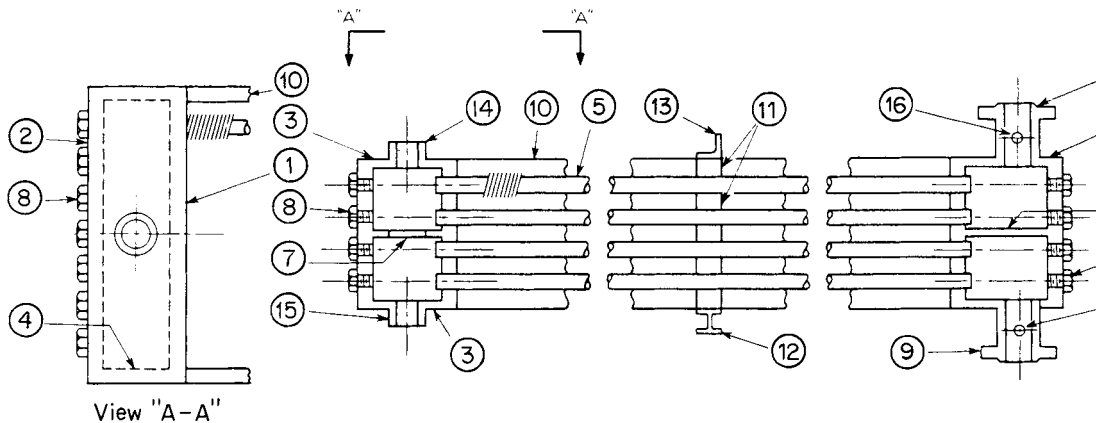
Typical construction of a tube bundle with plug headers: (1) tube sheet; (2) plug sheet; (3) top and bottom plates; (4) end plate; (5) tube; (6) pass partition; (7) stiffener; (8) plug; (9) nozzle; (10) side frame; (11) tube spacer; (12) tube-support cross member; (13) tube keeper; (14) vent; (15) drain; (16) instrument connection. (API Standard 661.)
